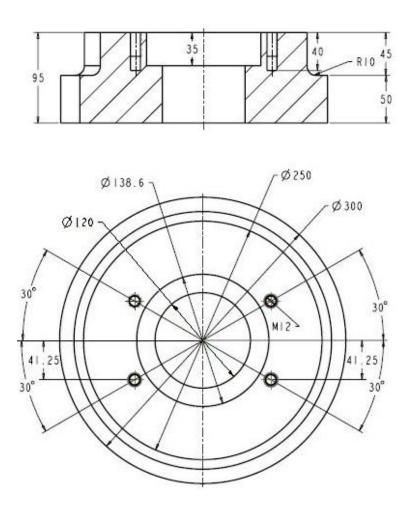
Technical Drawing of the Lower Blanking Supporting Die
